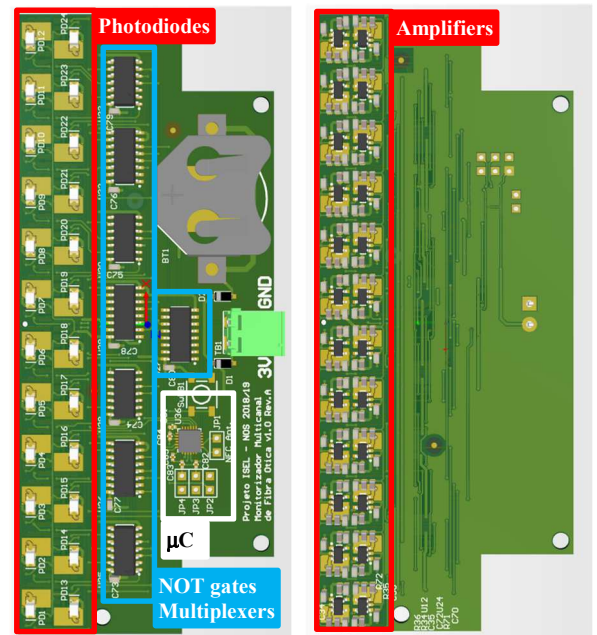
The 3D rendering of the Printed Circuit Board (PCB) of the developed prototype top view (left) and bottom view (right), On the left two photodiodes per optical channel and multiplexers for channel selection and microcontroller. On the right the channels amplifiers.
